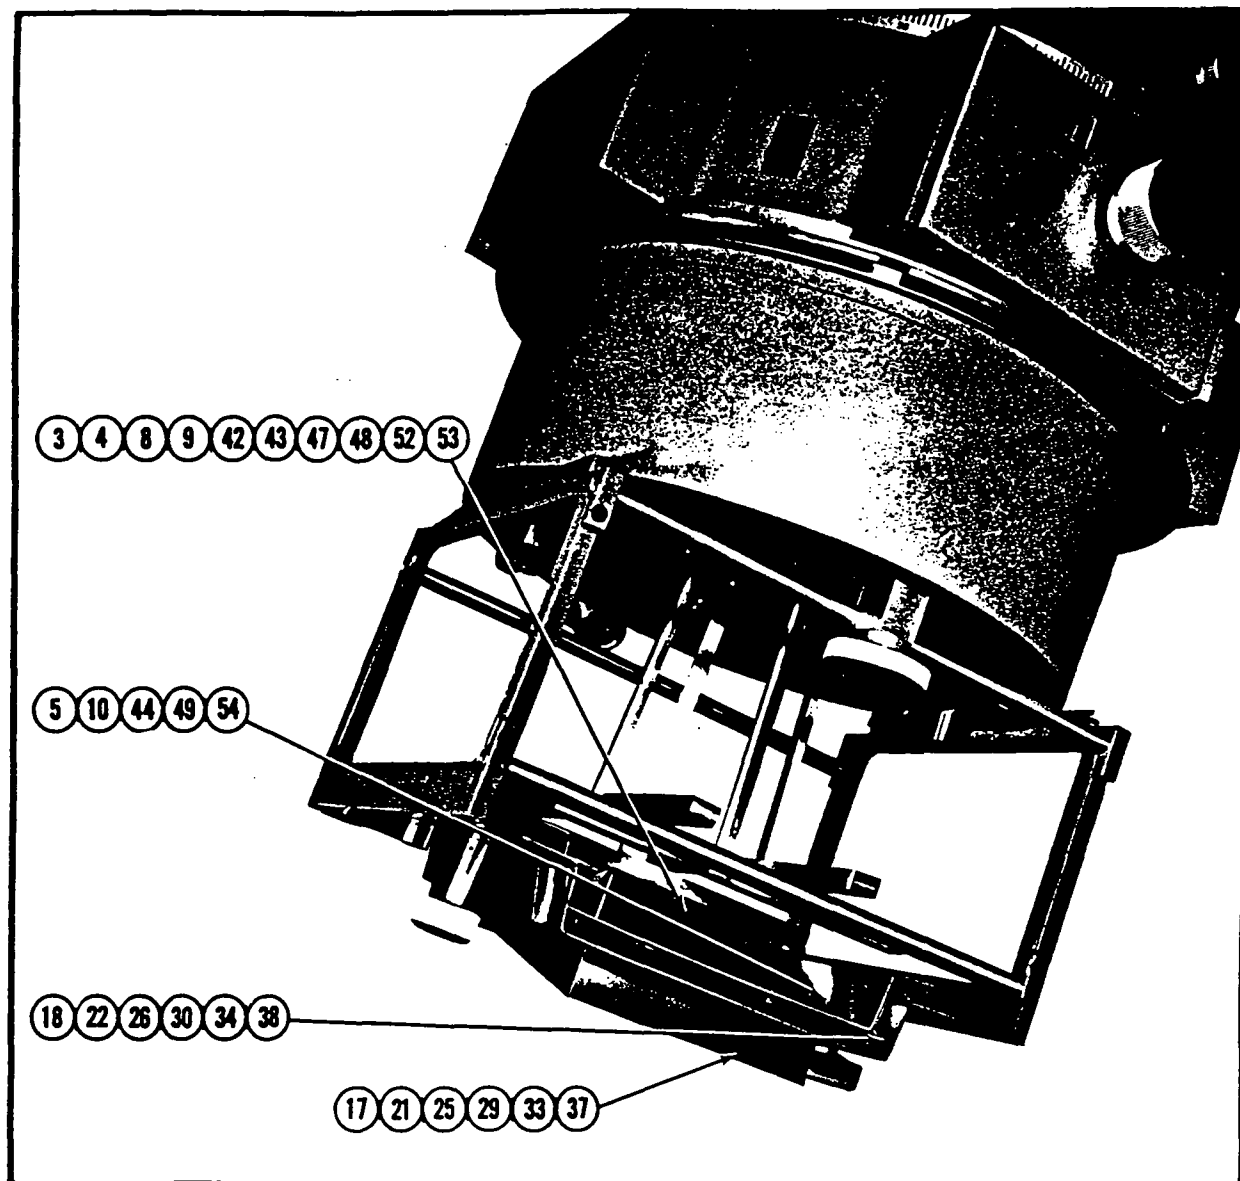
COBALT, WEDGES AND COMPENSATOR ASSEMBLIES
